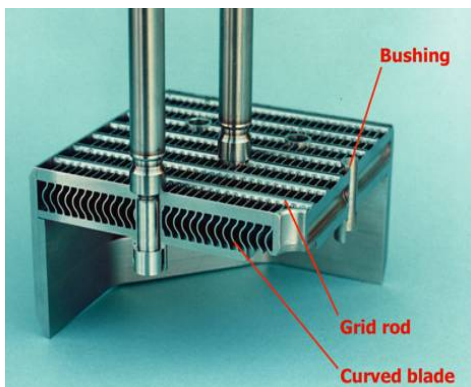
3: FUEL ASSEMBLY TOP AND BOTTOM NOZZLES
